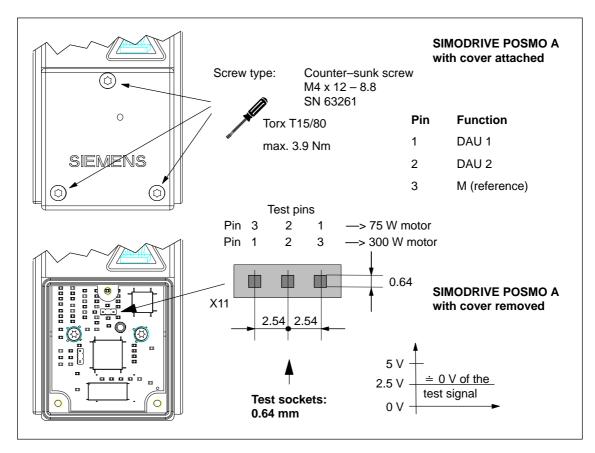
SIMODRIVE POSMO A test sockets with the cover removed
